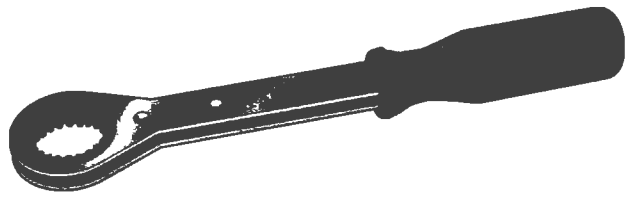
Sprocket Shaft Engine Rotation Wrench
